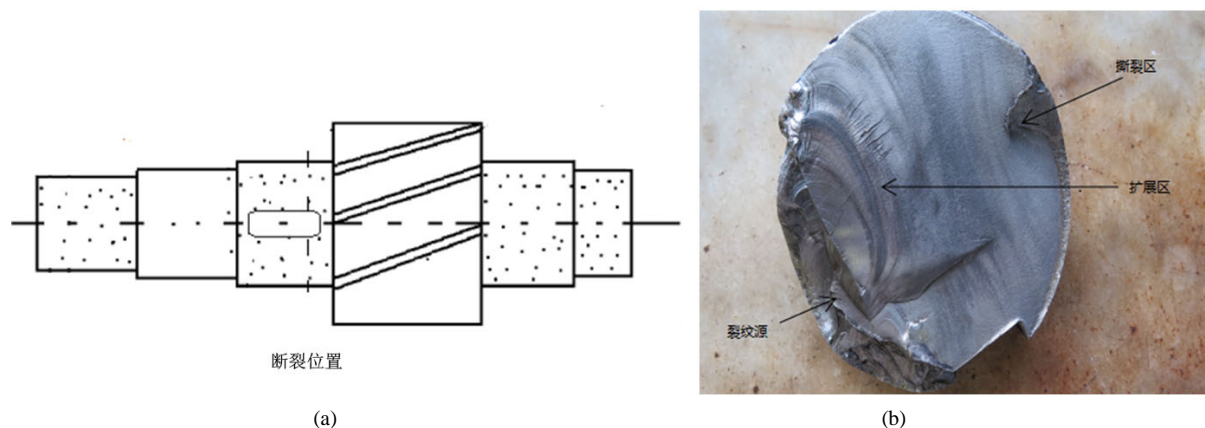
Fracture location and morphology of the gear shaft. (a) Fracture location; (b) fracture morphology
